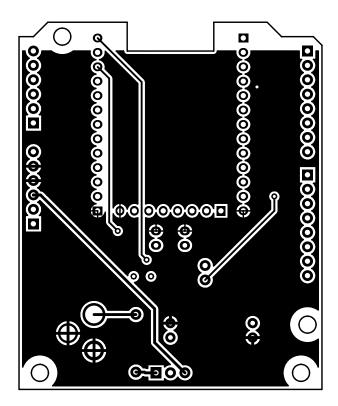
Bluetooth Shield PCB Copper Pattern (Bottom Layer)
